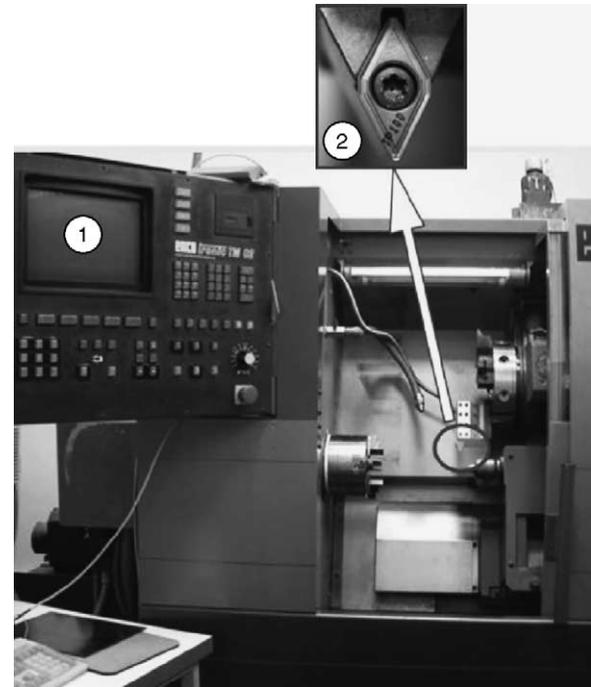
Experimental devices for the turning tests: (1) horizontal lathe equipped with numerical control, (2) tools used.
